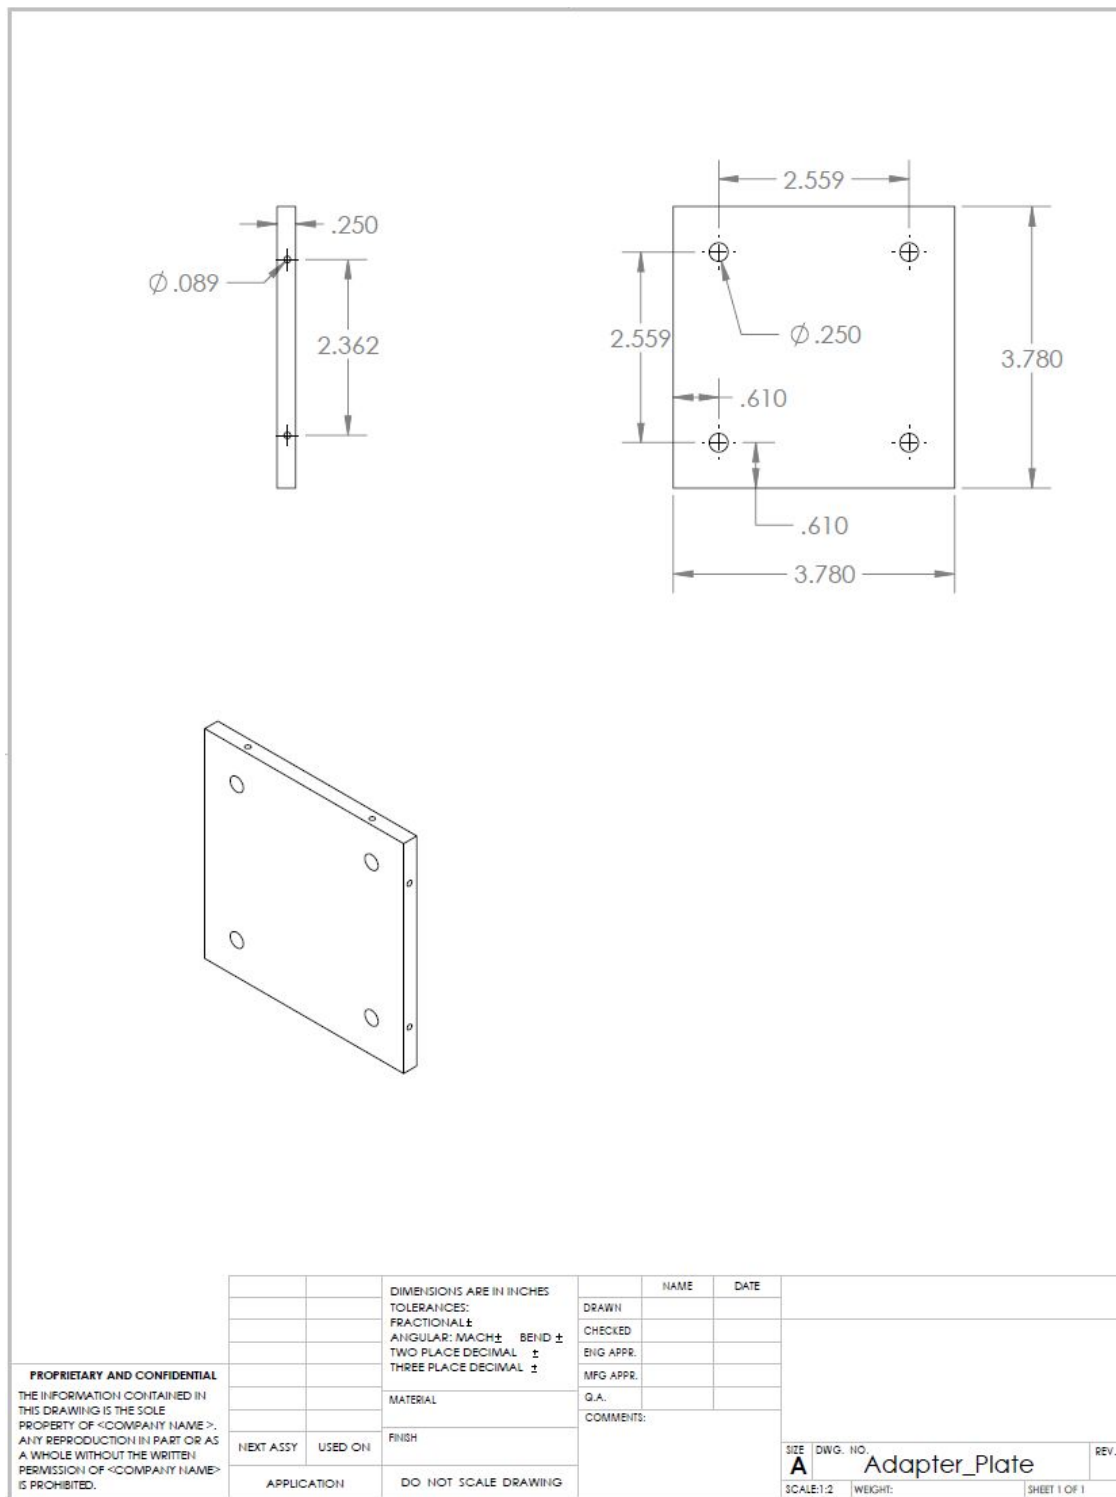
Mechanical drawing of the MURI shell adapter plate that will attach to the HASP plate.
